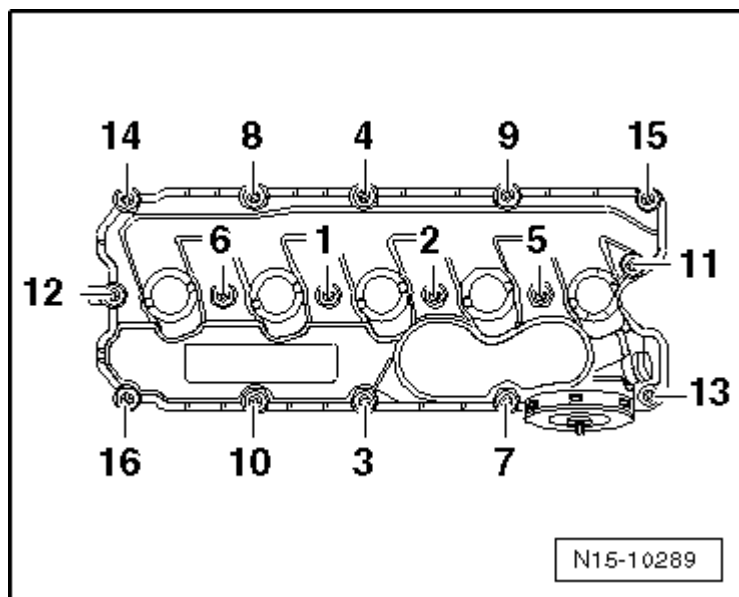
Cylinder Head Cover Bolts Removal Sequence
